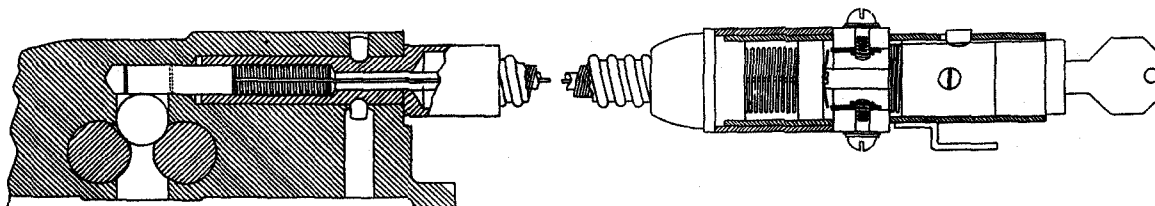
Sectional view of new lock mechanism in transmission (left) and on instrument board.
